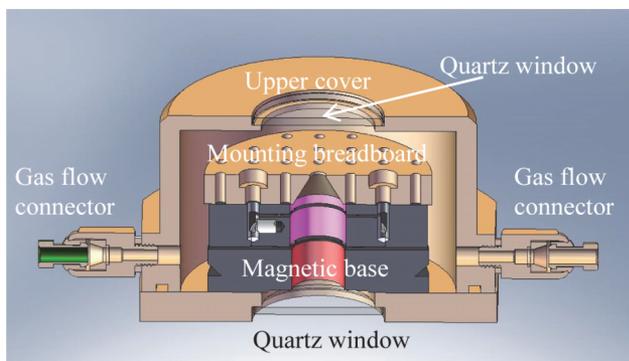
CAD drawing of the workpiece holder on a kinematic mount and an upper cover equipped with gas flow connectors.
